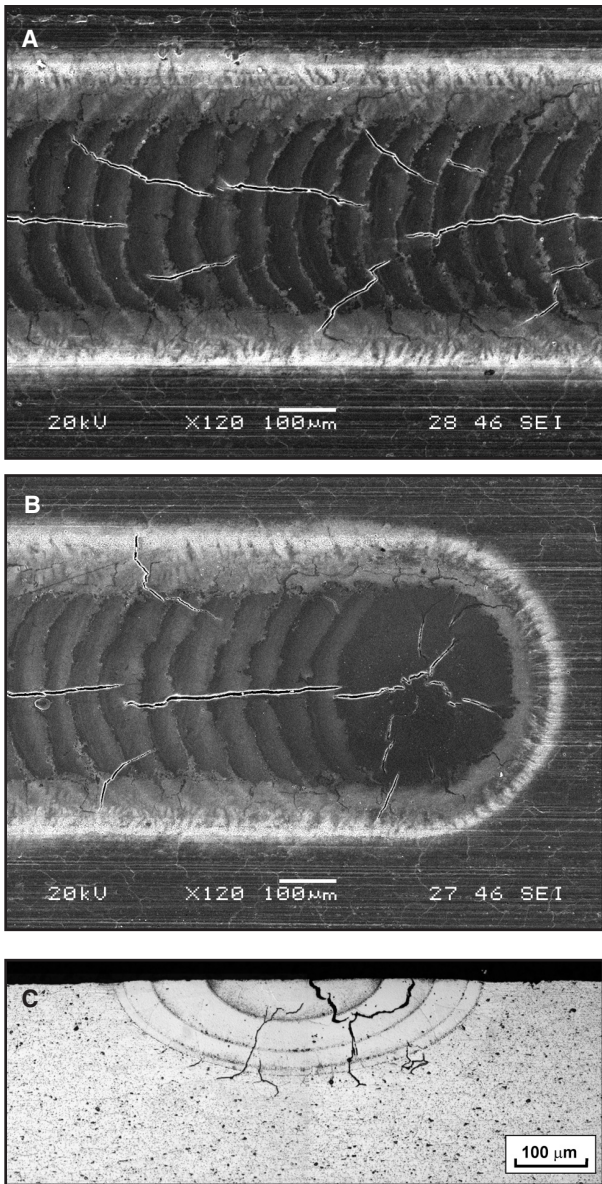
Severe solidification cracking in a weld made with a rectangular pulse shape with a peak power density of 11.5 GW/m^2 : A — Weld bead during steady welding; B — end of weld bead with crater cracking; and C — transverse section.
